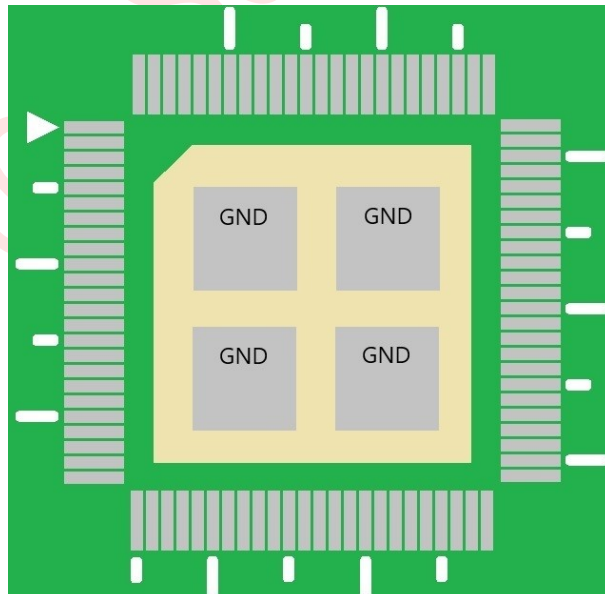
Design Suggestion-2 for LT7589A Bottom Pad PCB Layout
